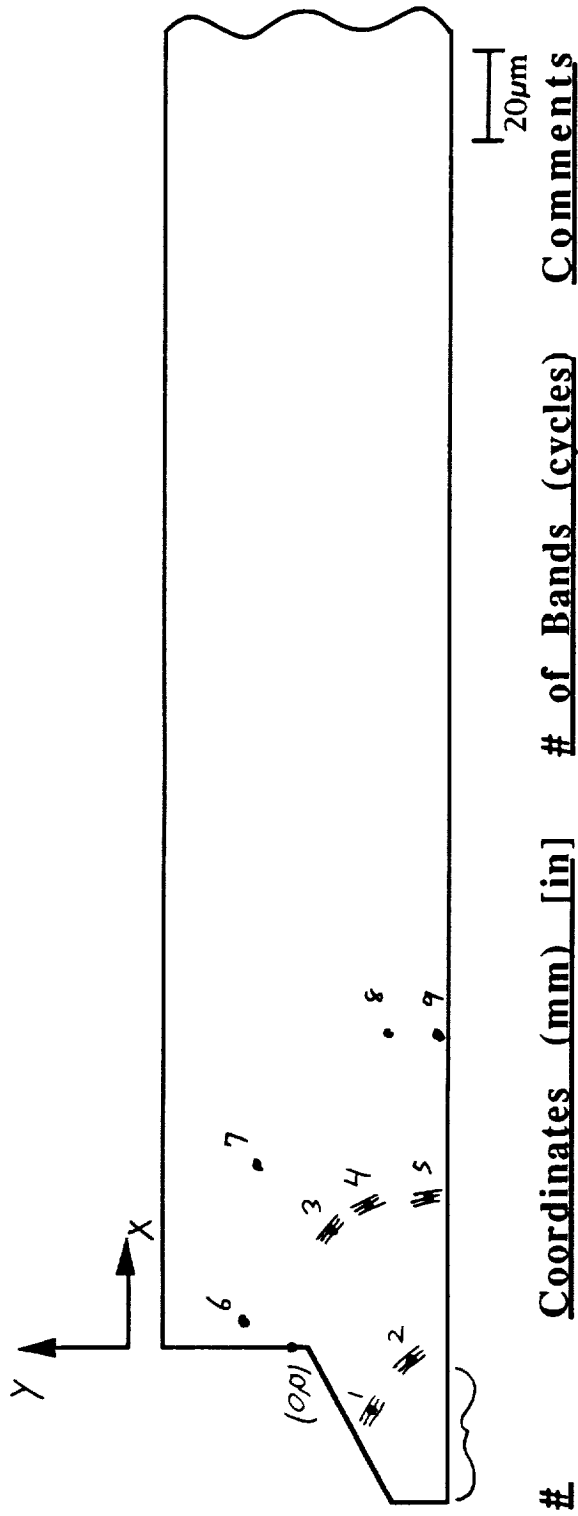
Rivet hole schematic: Upper rivet row, hole number 3J5, fatigue crack growth is in the forward direction.
